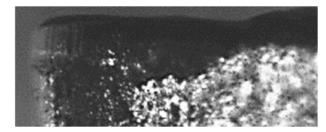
Final tool wear, WPP20S, 120 m·min-
